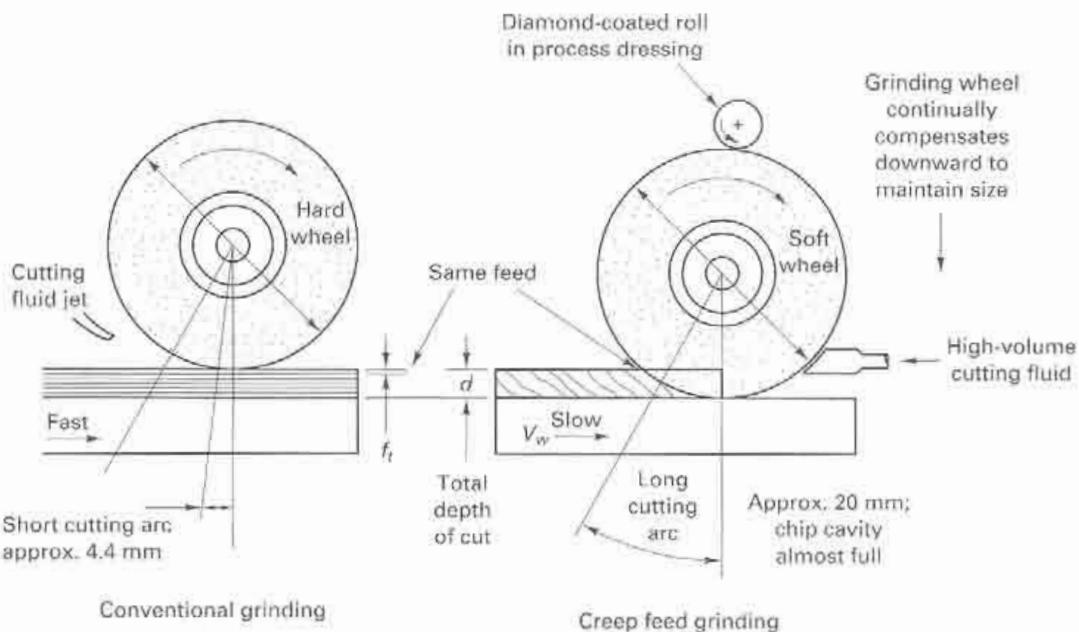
Conventional grinding contrasted to creep feed grinding. Note that crush roll dressing is used here; see Figure 28-14.
